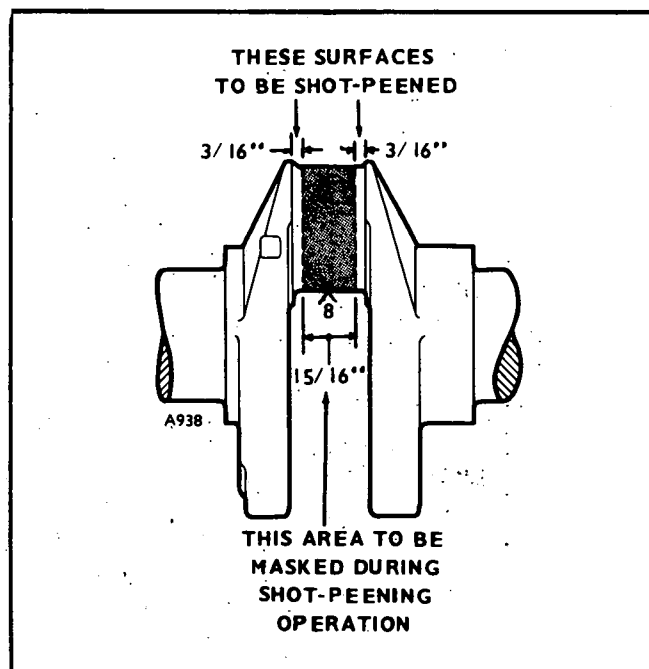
SHOT-PEENING THE CRANKSHAFT
